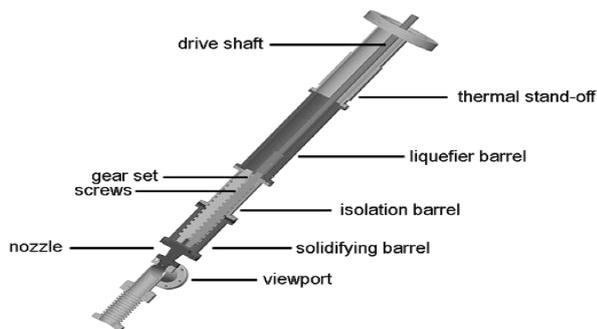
Twin Screw Extruder with Co-Axial Mounted Liquefier (6)
